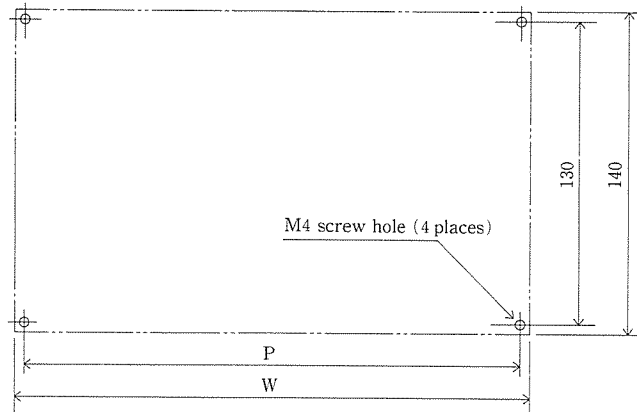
Mounting Holes of Basic Unit and Expansion Unit
